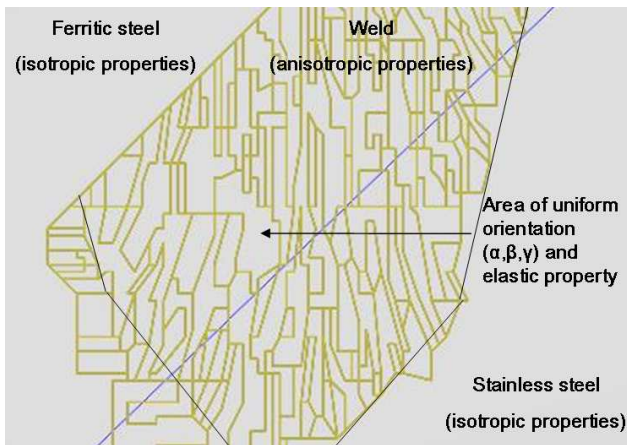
Virtual map of the front section of the weld specimen.
